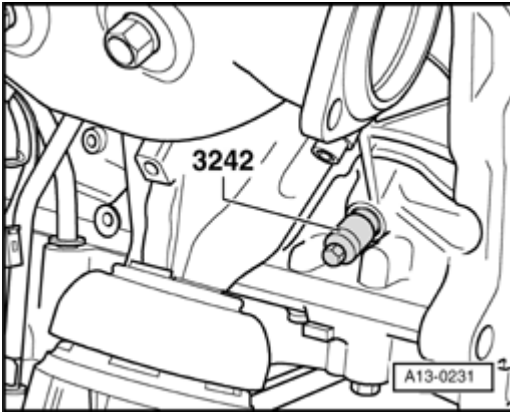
Crankshaft Holder 3242 Installed Into Crankshaft
